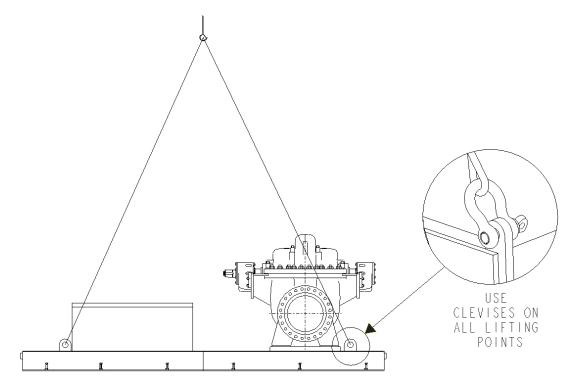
Example of the proper lifting method for baseplate-mounted units without a driver indicating the use of clevices
